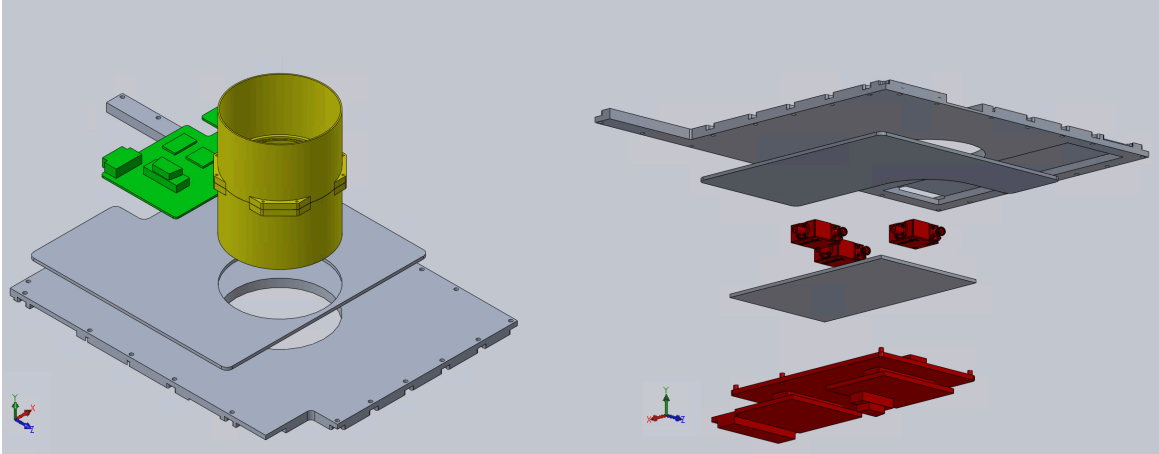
Exploded views of the DSC showing primary bus locations used for mechanical interfacing.
